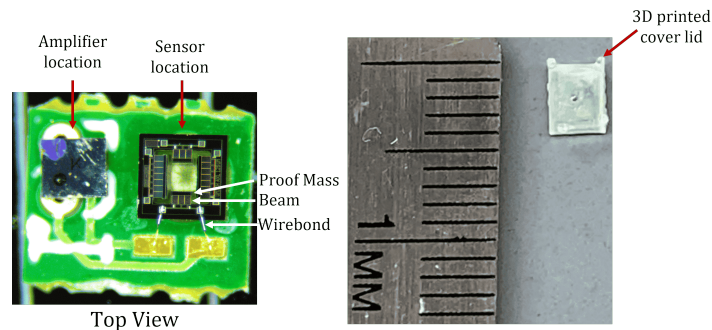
(A) Amplifier LMV1015-25 and single resonance sensor mounted on minimized printed circuit board (PCB). Sensor is wirebonded to the PCB. (B) PCB-sensor assembly covered by a 3D printed lid. The dimensions of the assembly are 3.56mm X 3.21mm X 1.0mm.
